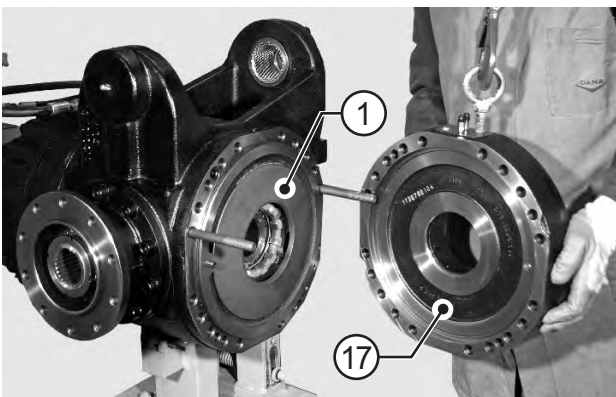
Move the cylinder (17) outwards while supporting the Belleville washers (1). Remove the Belleville washers (1) and write down direction of assembly.
